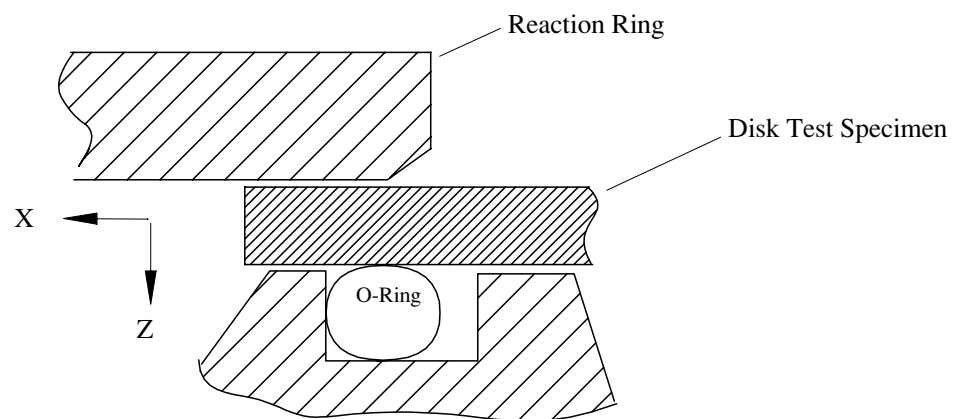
Cross-sectional view of the test specimen, reaction ring, O-ring and groove.
